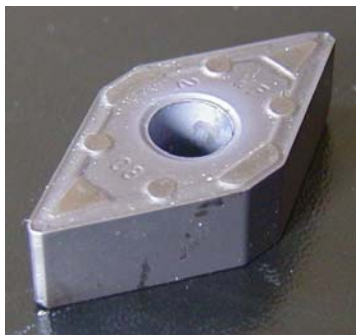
Worn cutting blade after turning of the specimen No. 1
